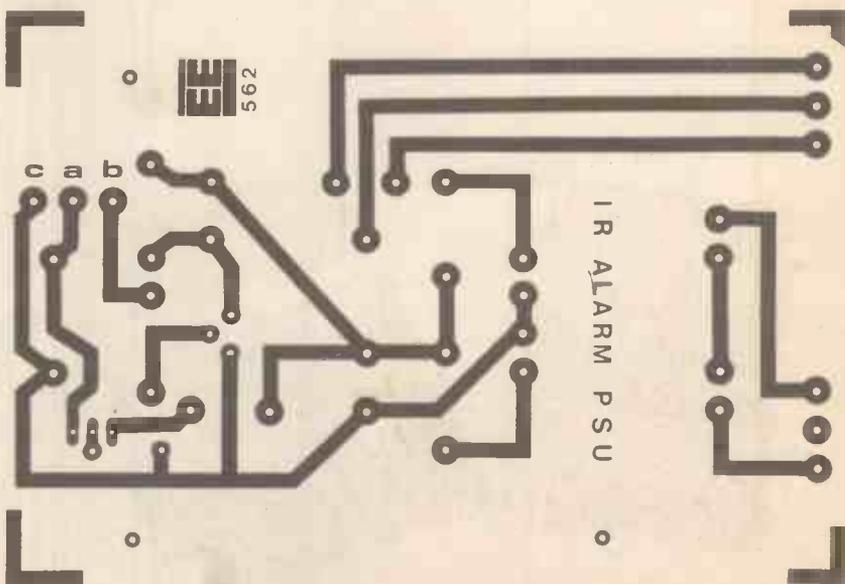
Full size printed circuit master pattern for the Infra Red Alarm—Power Supply/Relay Driver.
